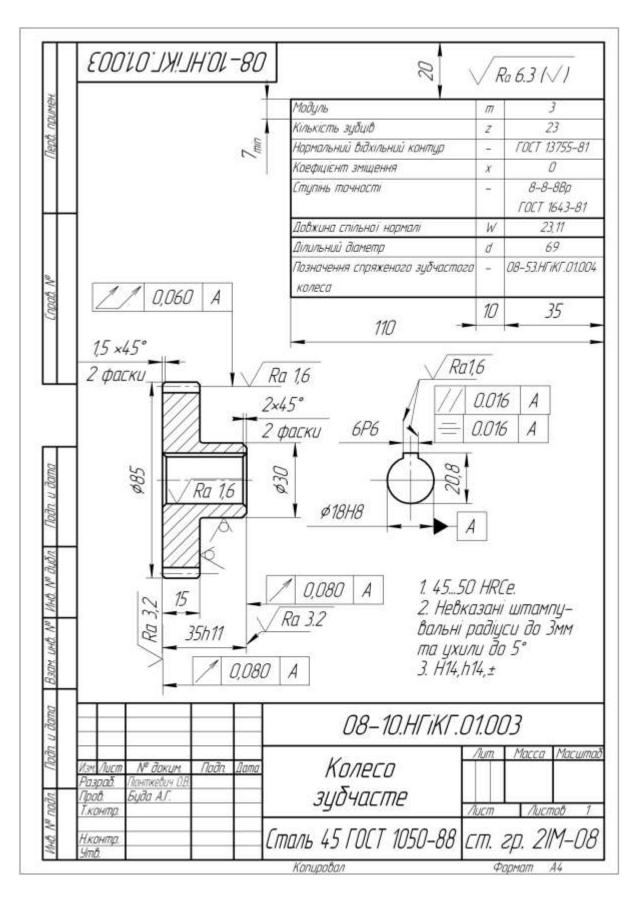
Sketch of a spur gear with uncorrected cylindrical gear wheel (*spur wheel*)
